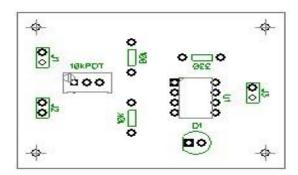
PCB layout of IR Sensor circuit from DipTrace
